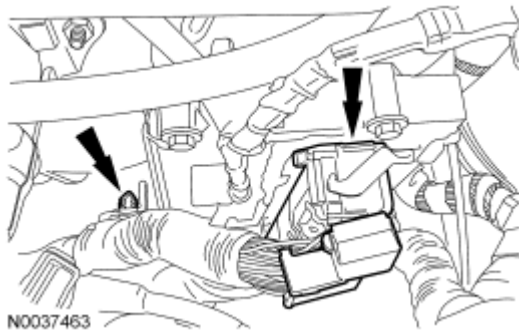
Locating Powertrain Control Module (PCM) Electrical Connector And Pin-Type Retainer
